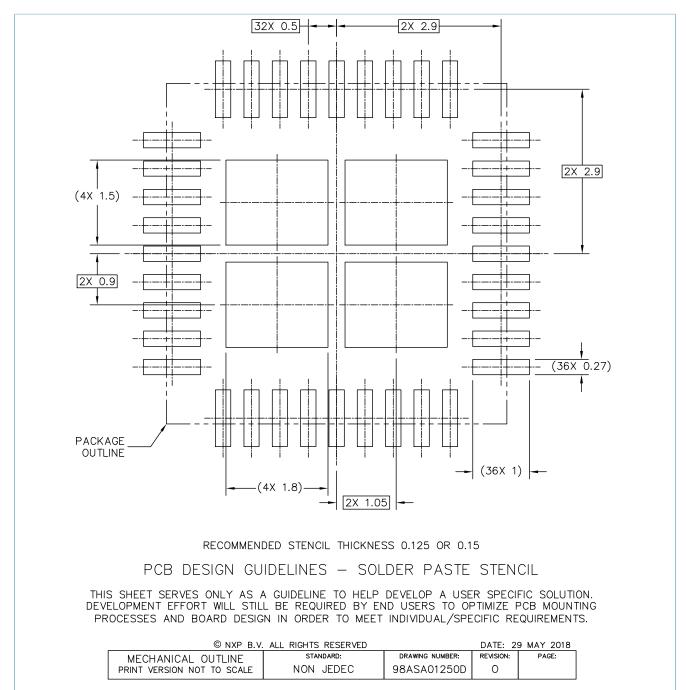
Reflow soldering footprint part3 for HVQFN36 (SOT1092-6(DD))
